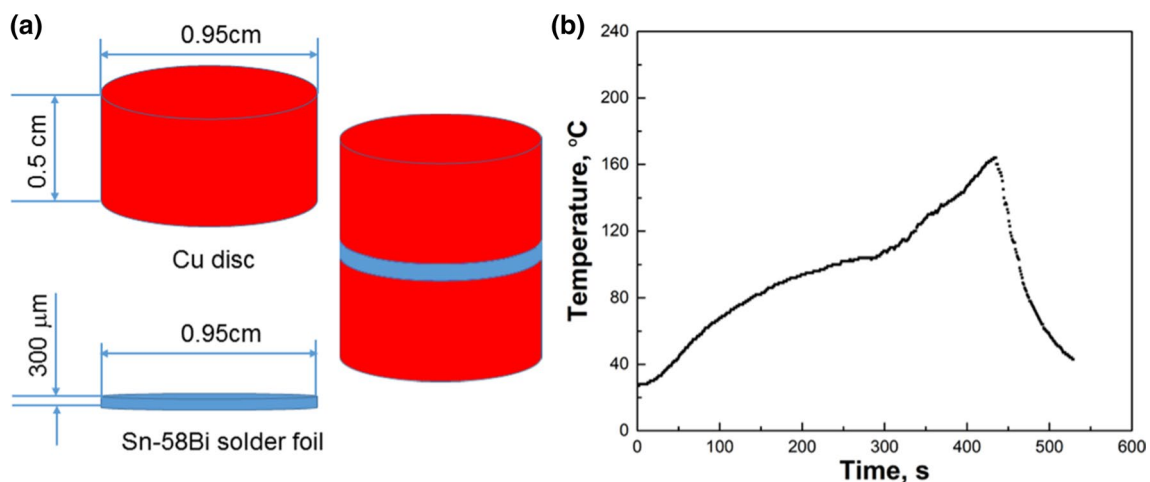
Preparation on solder joints: (a) assembling of joint and (b) reflowing parameter.
